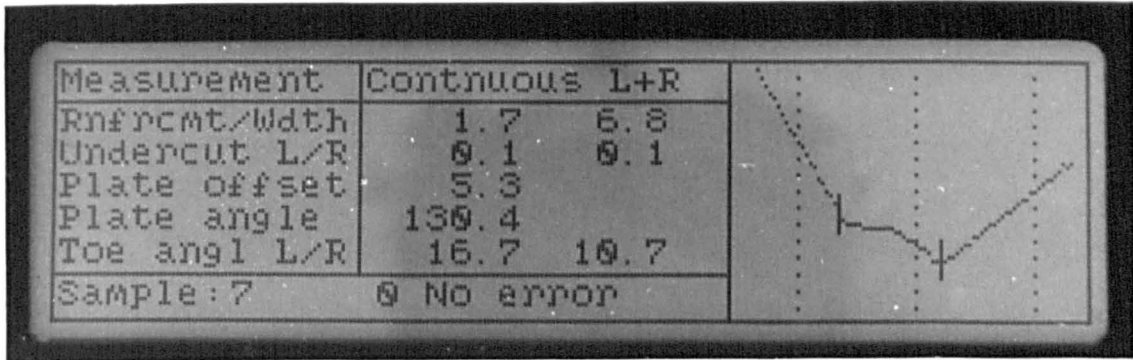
LCD screen - Measurement display with fillet weld
